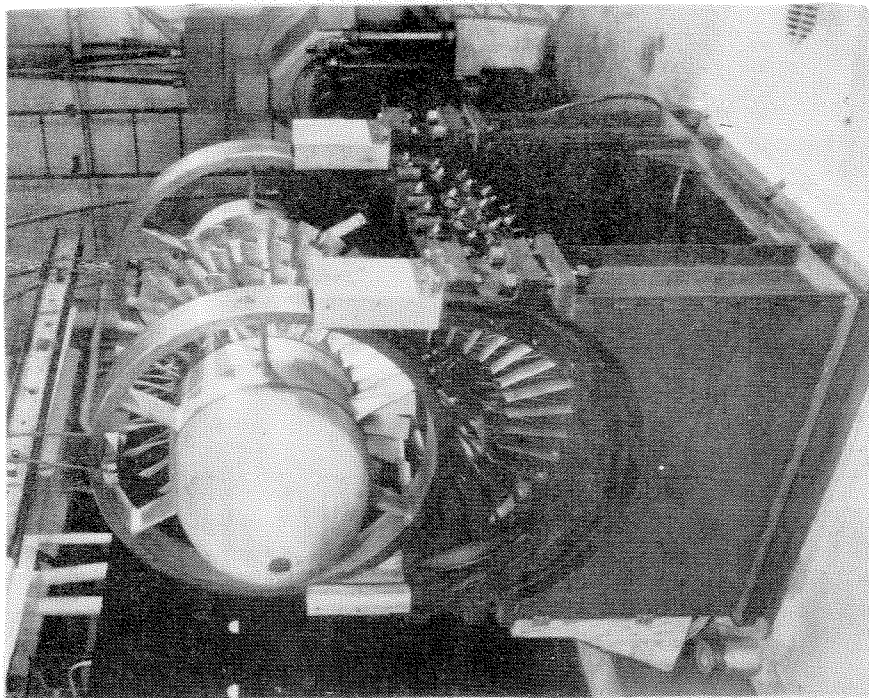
ROTOR ASSEMBLY BEING PLACED IN LOWER CASE.
